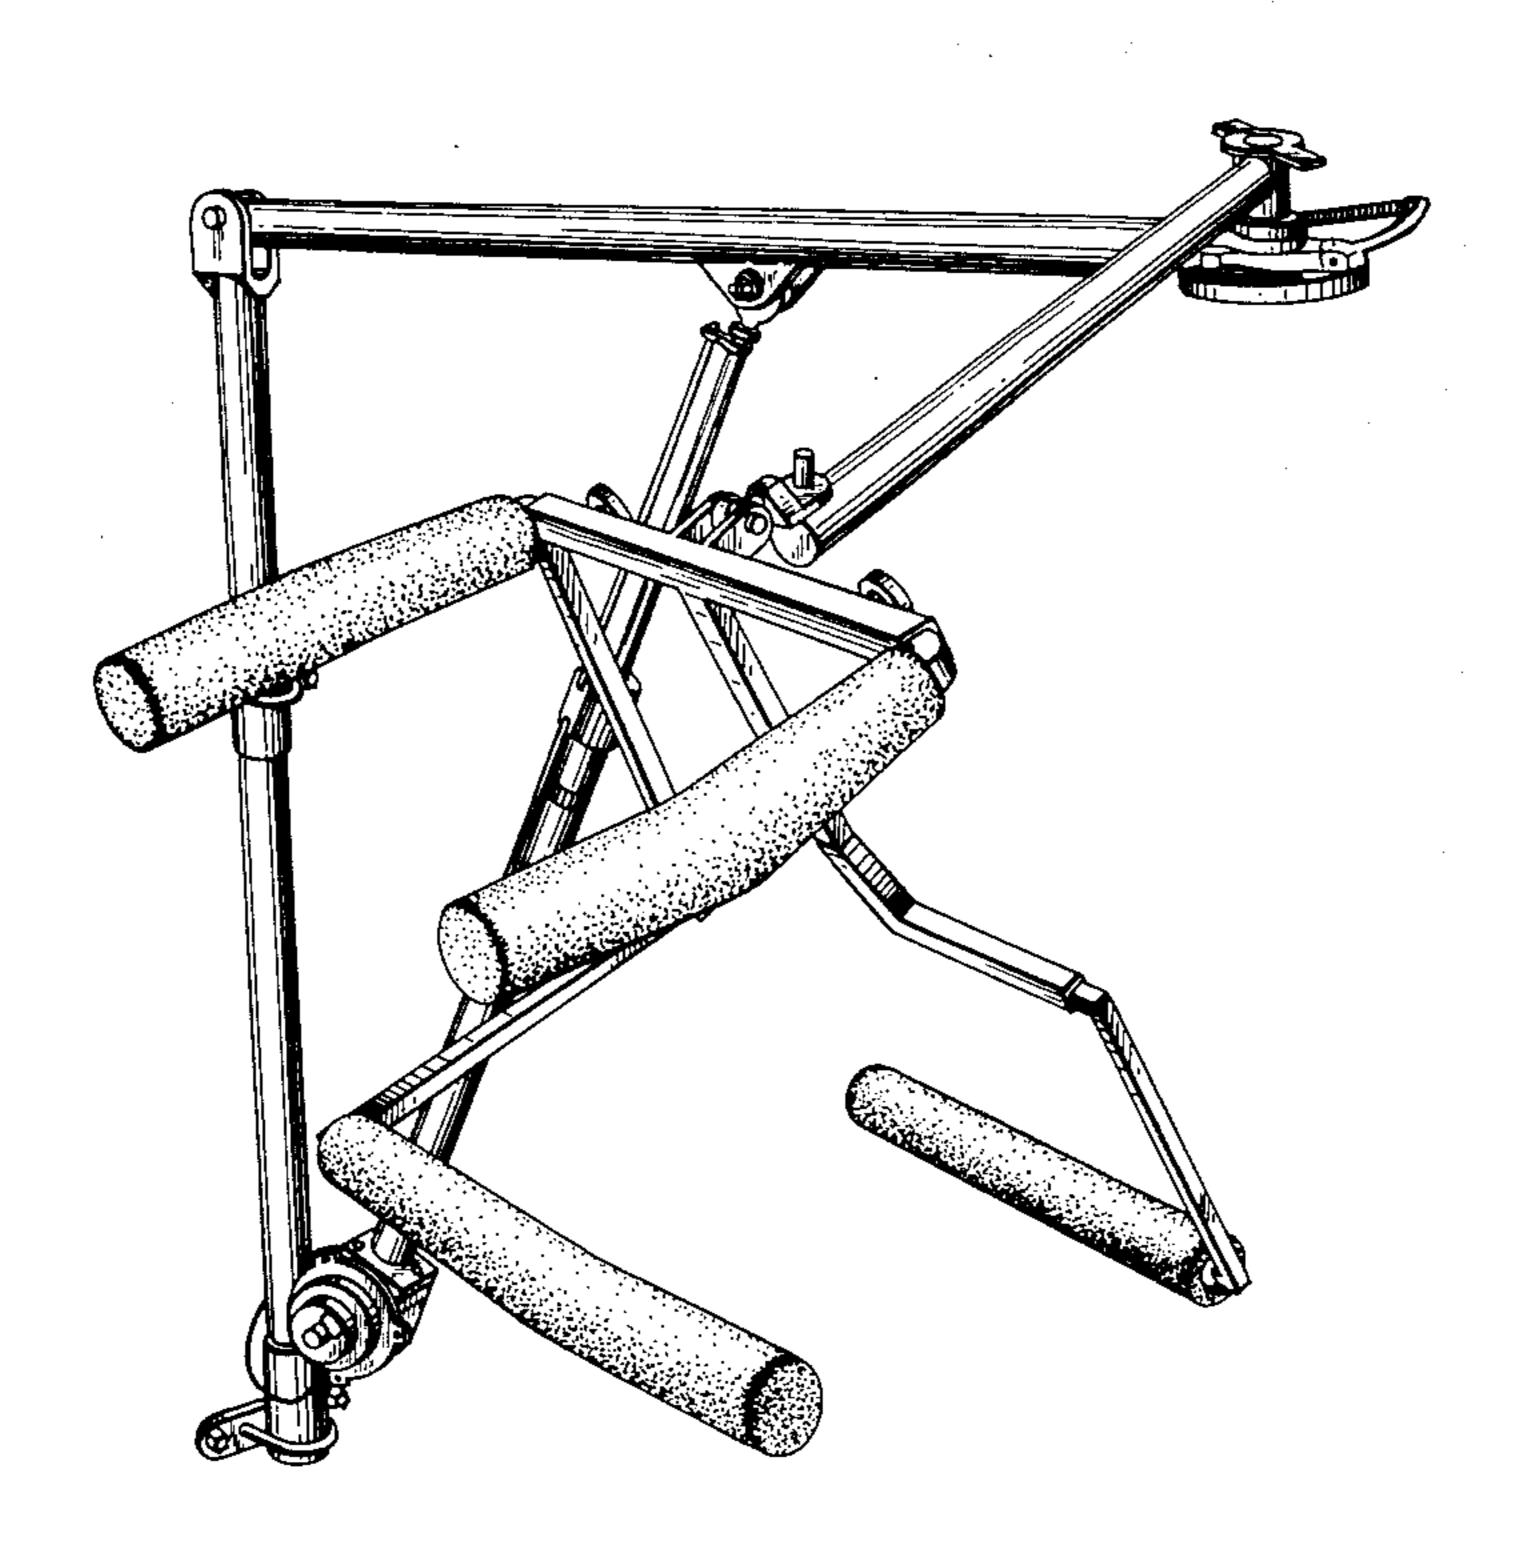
is a rear perspective view of a combined lifting tool and mounted yoke for handicapped persons, showing my new design;
